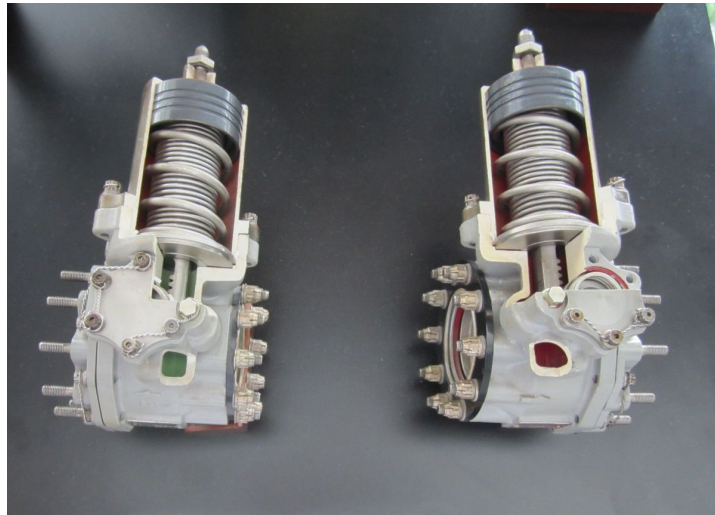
The RL10 rocket engine's Oxidizer Inlet Shut-Off Valve (left) and the Fuel Inlet Shut-Off Valve (right) [33].
